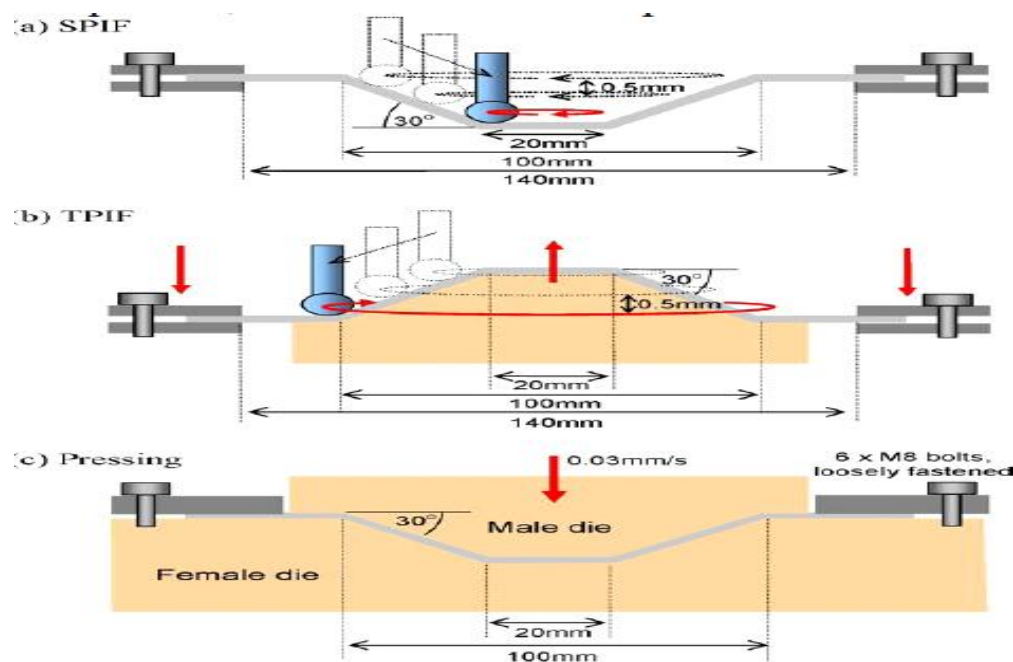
a) SPIF b) TPIF C) pressing forming
